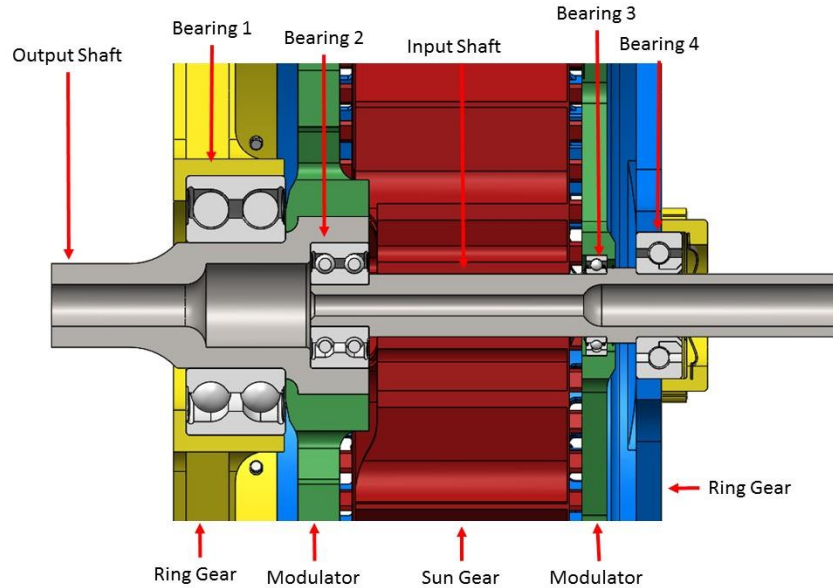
Cross-sectional view of PT-4 showing bearing and shaft layout
